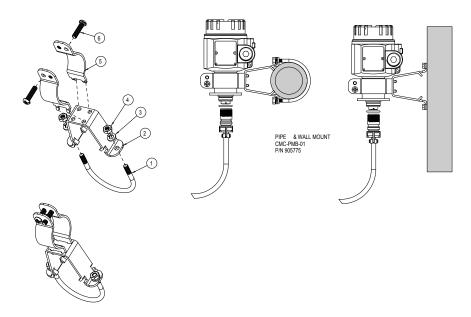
CorrTran MV Mounting Bracket Assembly and Installation
